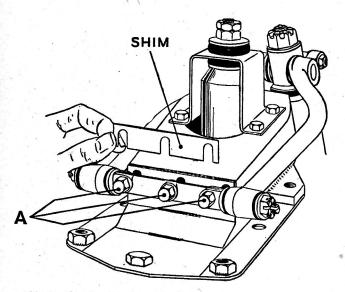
This drawing shows the location of the camber settings shims on the Series 4AB.
